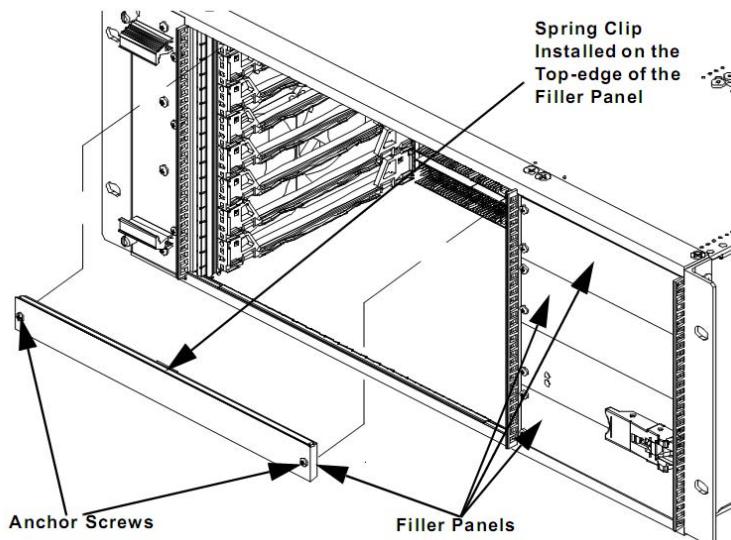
Installing Filler Panels on the Indoor Unit's Chassis
